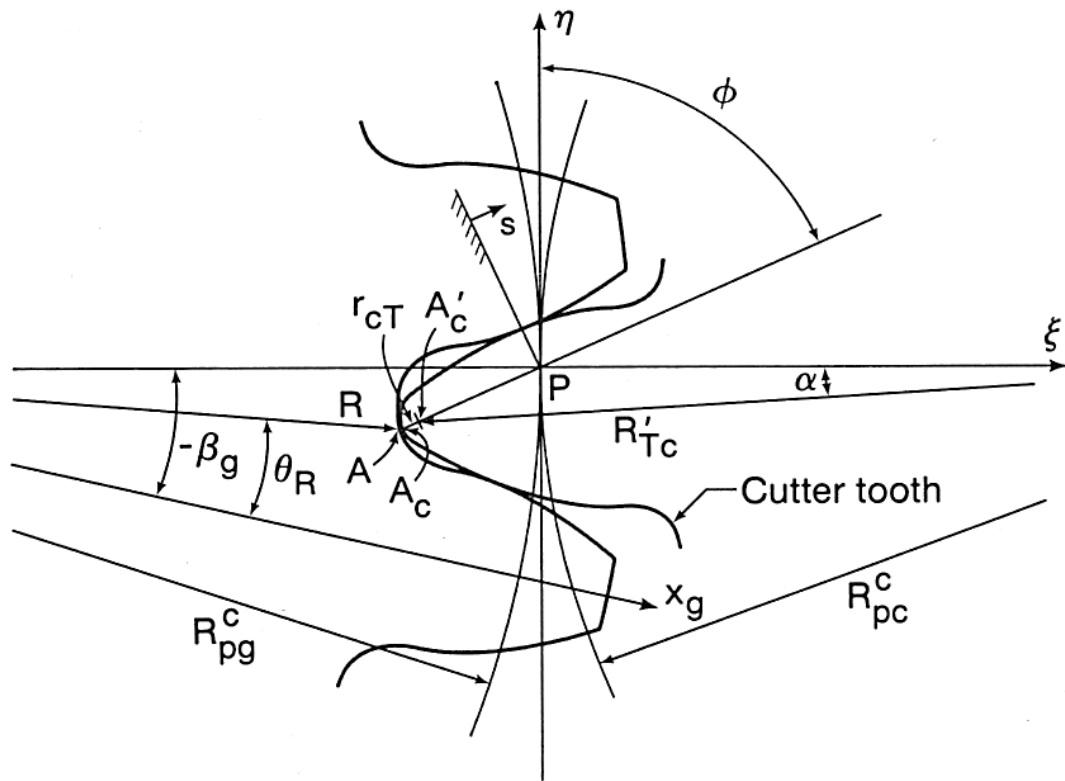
Cutting of the gear by pinion cutter. In this figure, ϕ represents ϕ (modified from Colbourne, 1987, p. 222).
